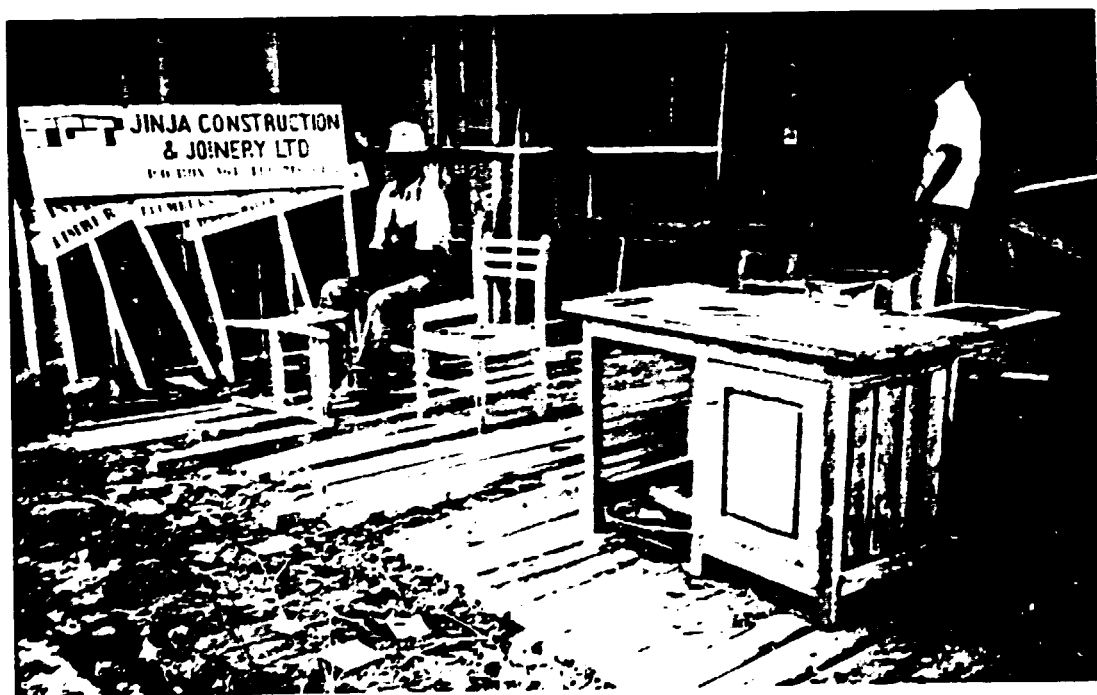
Furniture made at the Jinja Construction and Joinery workshop
